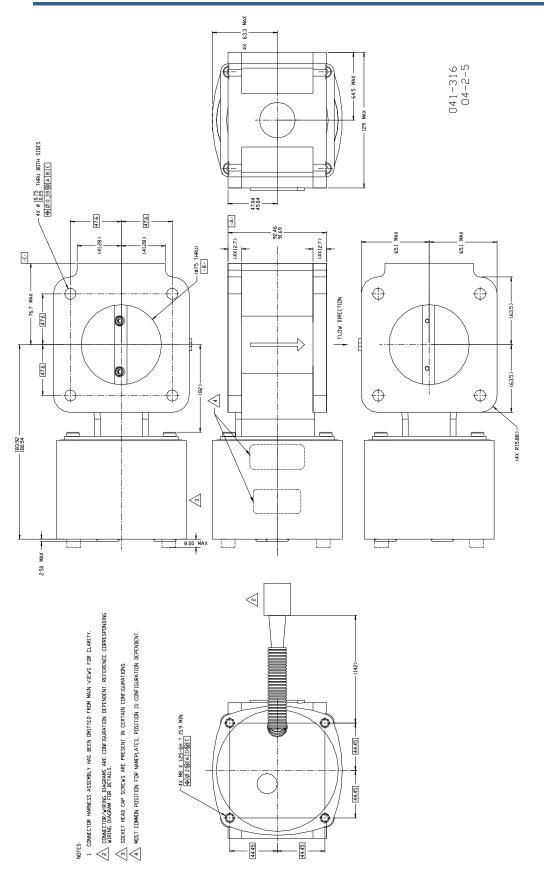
Flo-Tech Outline Drawing (75 mm Flange Mounting)
